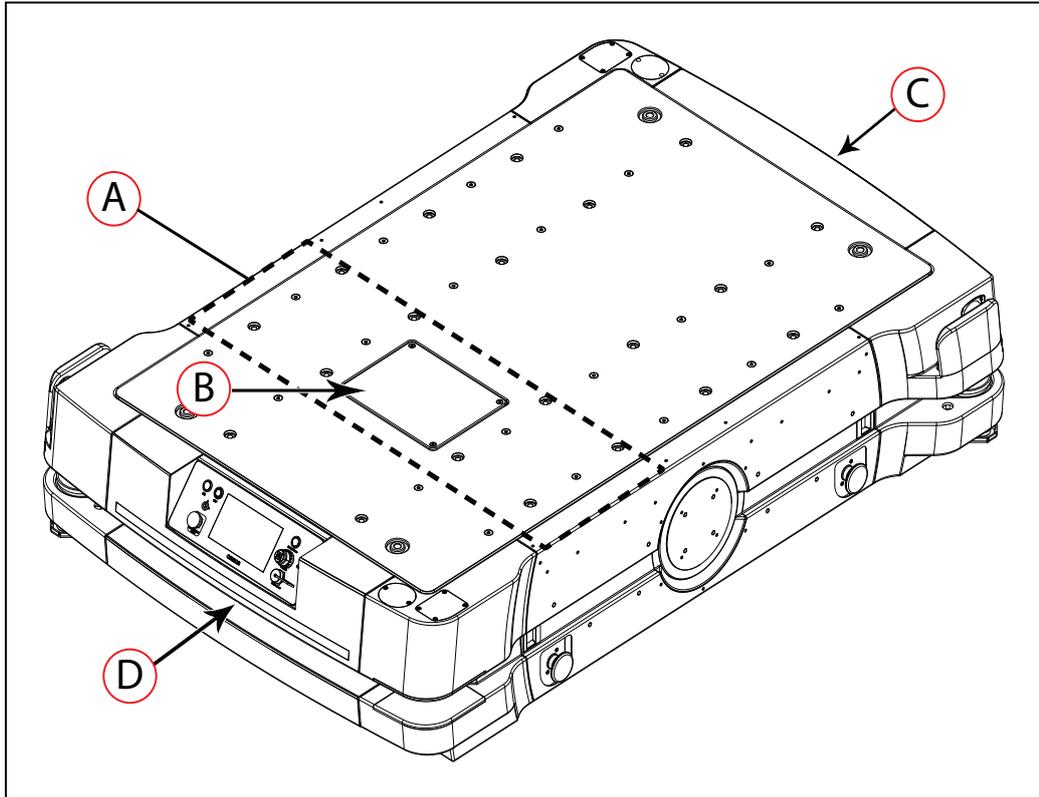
(A) Electronics Bay Location, (B) User Access Panel Cover, (C) Front and (D) Rear of the AMR
